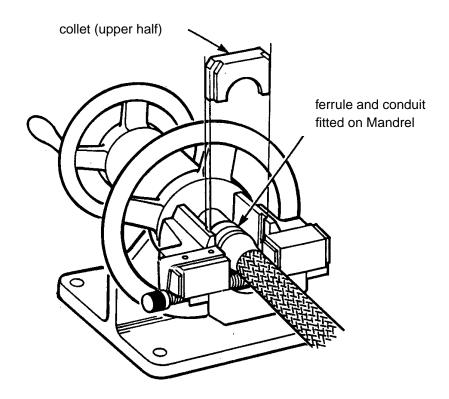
Installation of Conduit and Ferrule, and Collet Upper-Half
